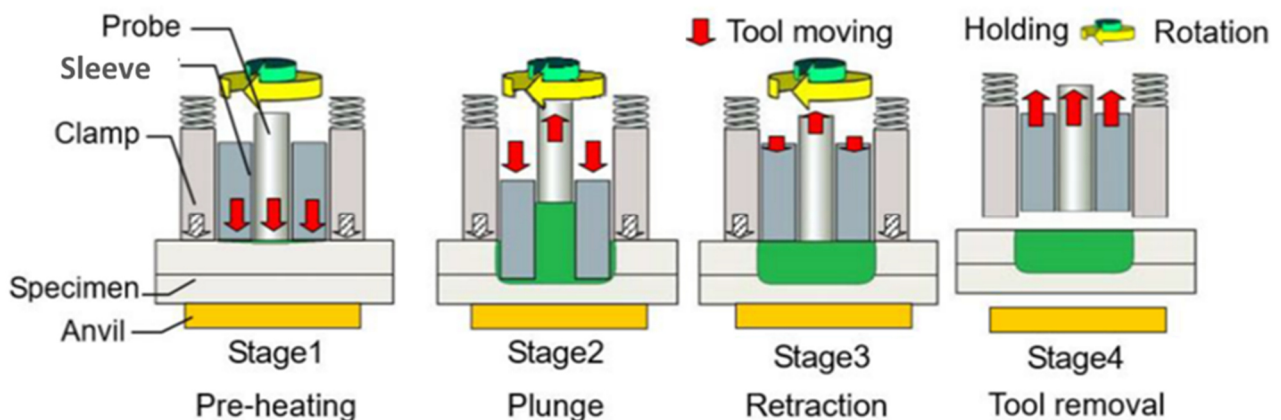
Schematic illustration of SP variant of Refill FSSW process: Stage 1 – Pre-heating and specimen fixation; Stage 2 – Sleeve plunge and probe retraction; Stage 3 – Return of the tool to the starting position, and Stage 4 – Tool removal [Adapted from 38].
